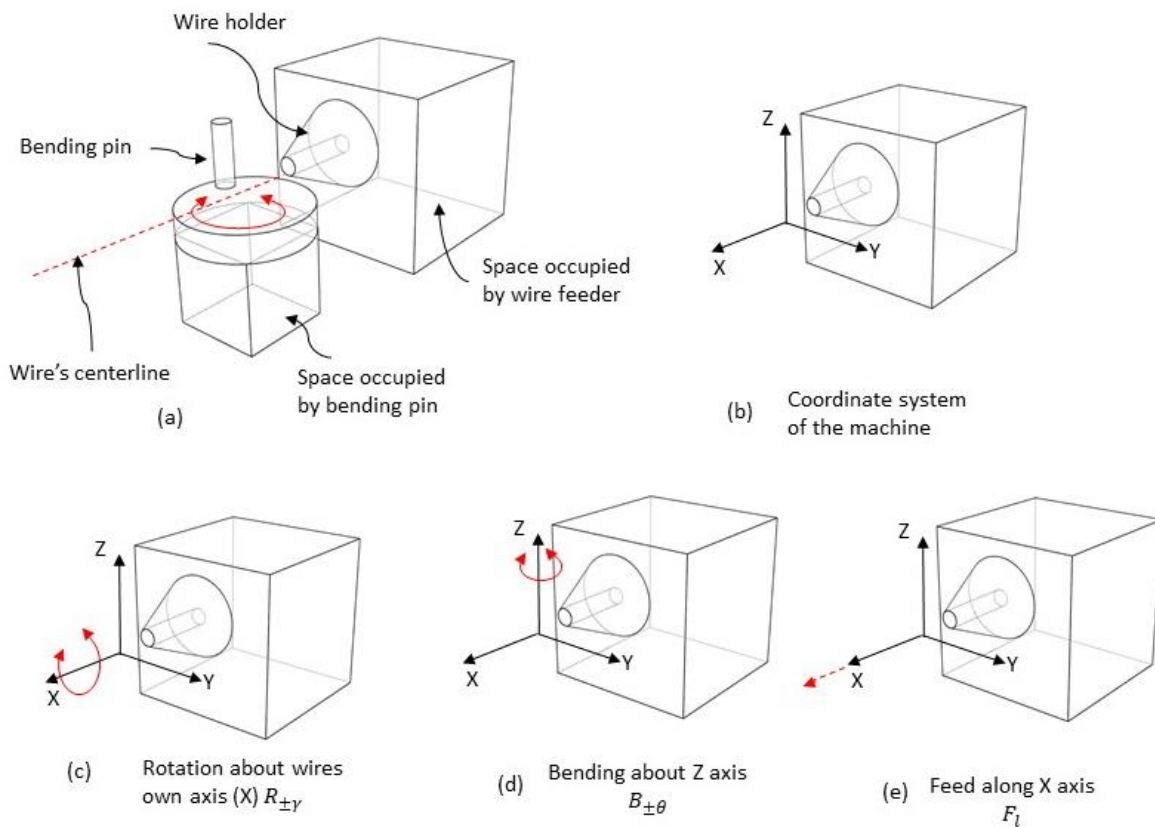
A generalized form of a wire bending machine with its coordinate system and nomenclature. (a) A wire bending machine consist of a wire feeder, wire holder and a bending pin with their occupied spaces, (b) coordinate system, (c) rotation about wire's own axis, (d) bending about Z-axis, (e) feed along X-axis.
